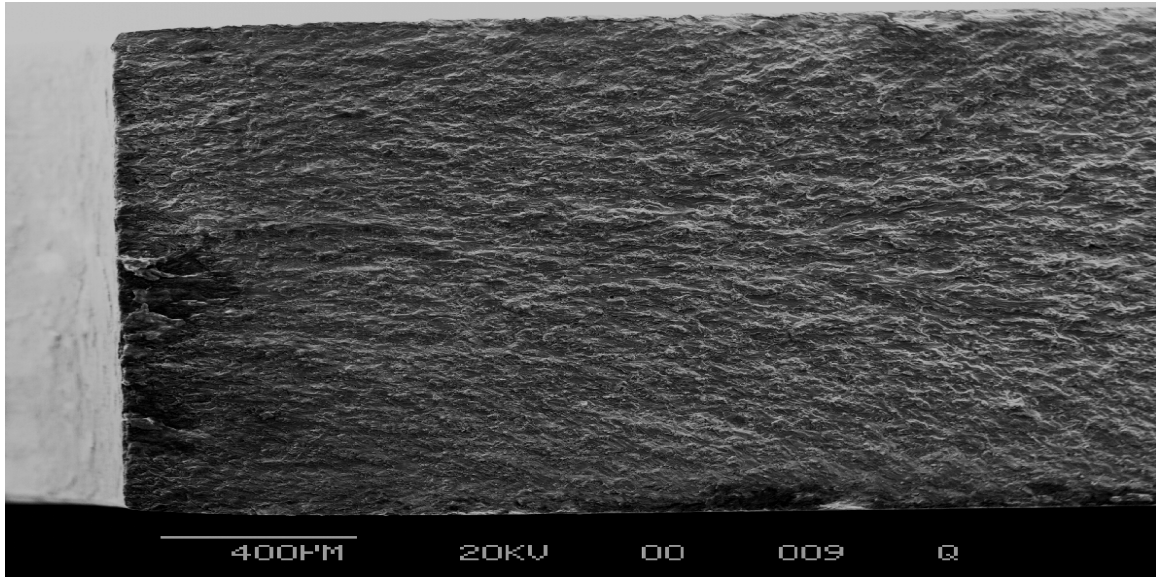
Fracture surface of specimen 8 near the hole showing initial crack.
